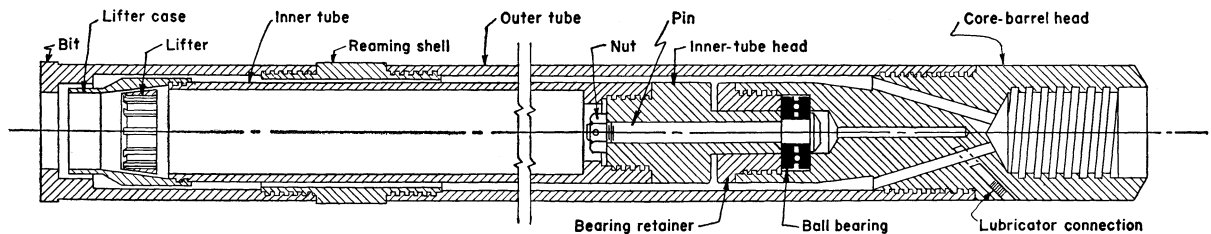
DRAWING OF SERIES M DOUBLE-TUBE CORE BARREL.
